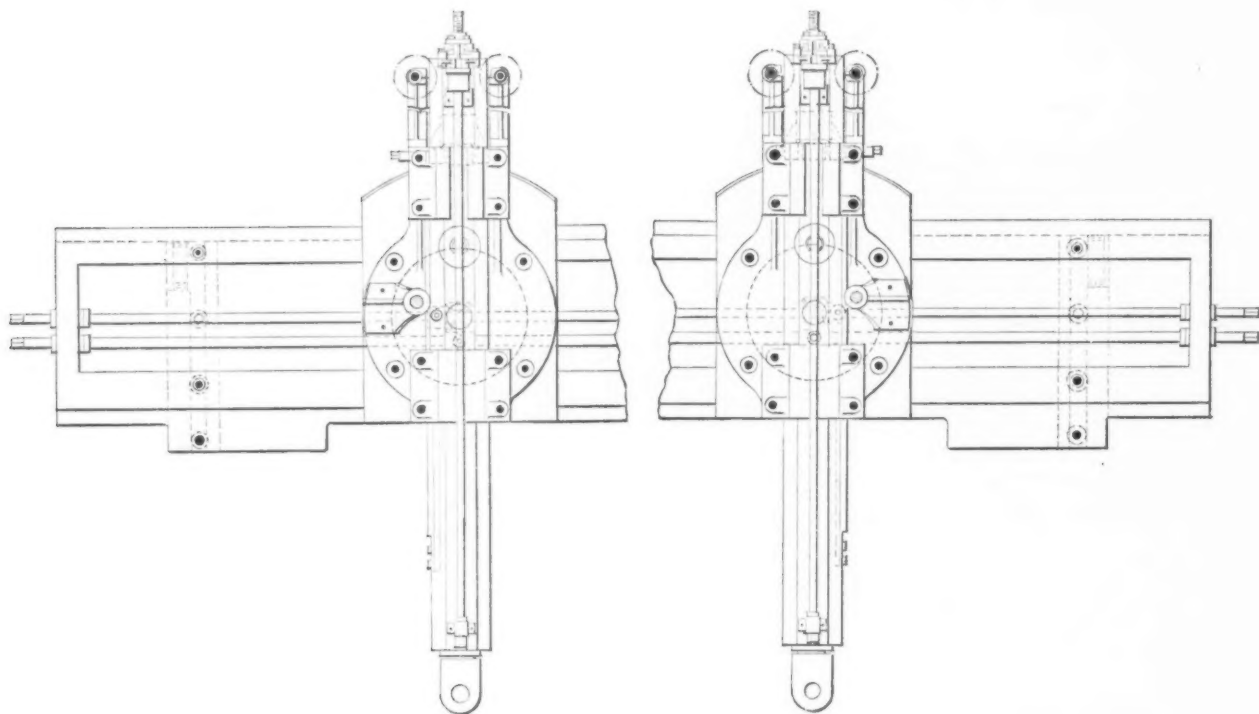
Front Elevation of Cross Rail and Saddles.
